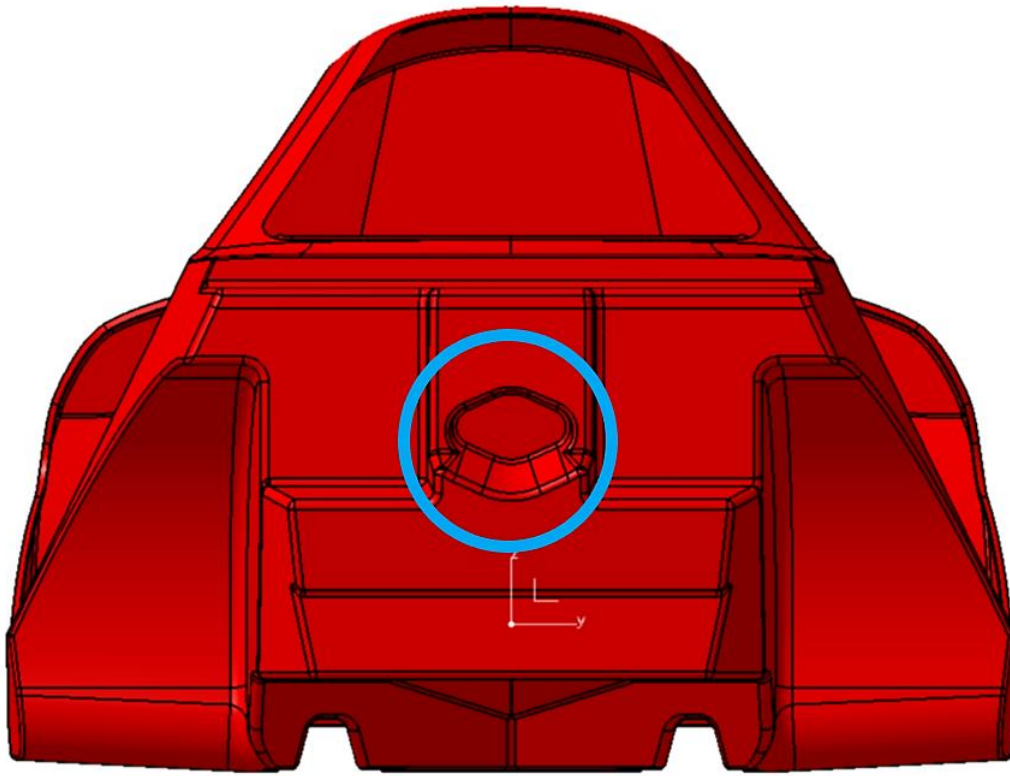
CAD model of the real monocoque with the detail of the housing for the hole of steering column (CATIA V5)
